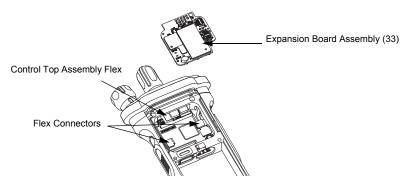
Remove Flex Connectors and Expansion Board Assembly
